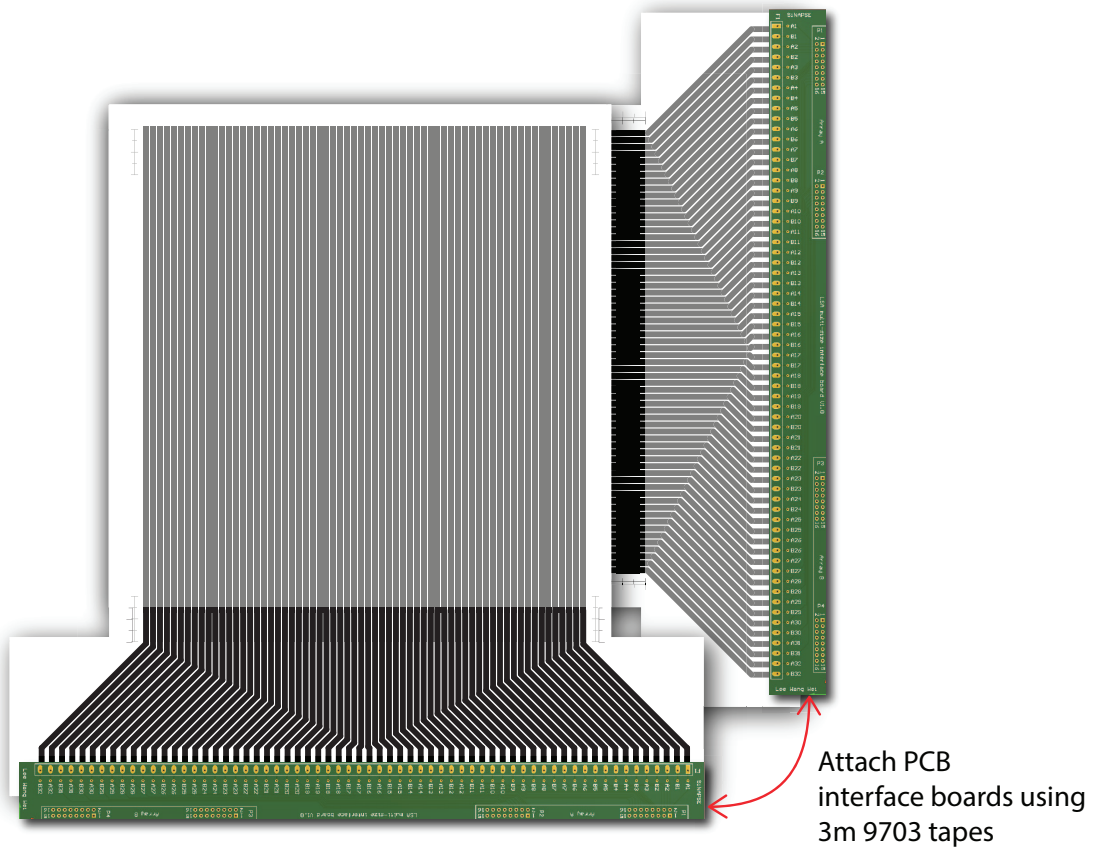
Using the 3M 9703 double sided tape again, attach the adapter traces to the interface PCBs.
